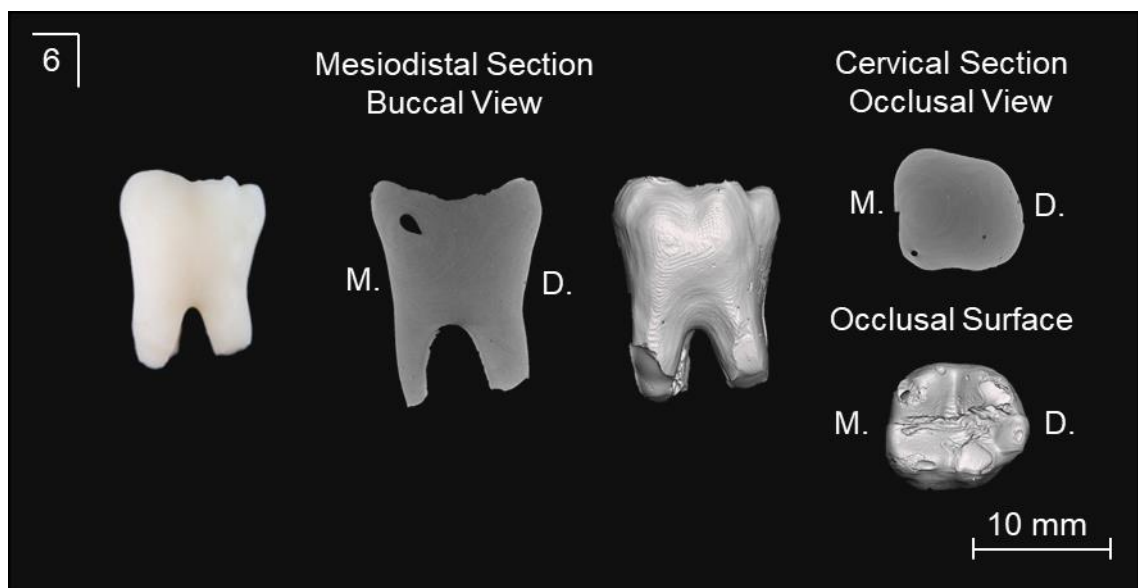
Mandibular first molar printed using extrusion deposition modelling. *Left to Right:* printed tooth, XMT of the printed tooth (buccal view), 3D rendering of the printed tooth (buccal view), XMT of the printed tooth (occlusal view) and 3D rendering of the printed tooth (occlusal view).
